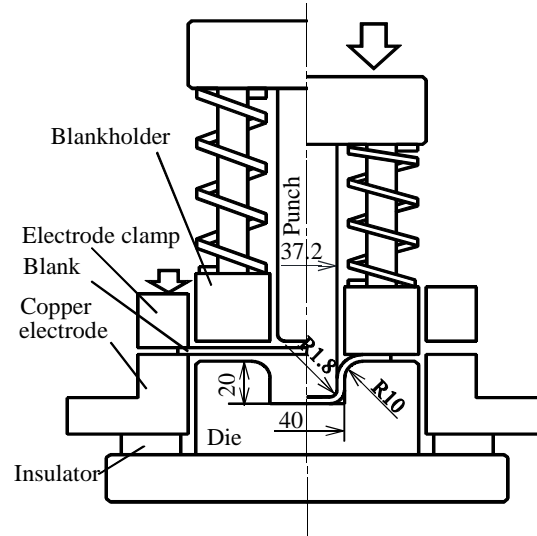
Hot hat-shaped bending using resistance heating of titanium alloy sheet
